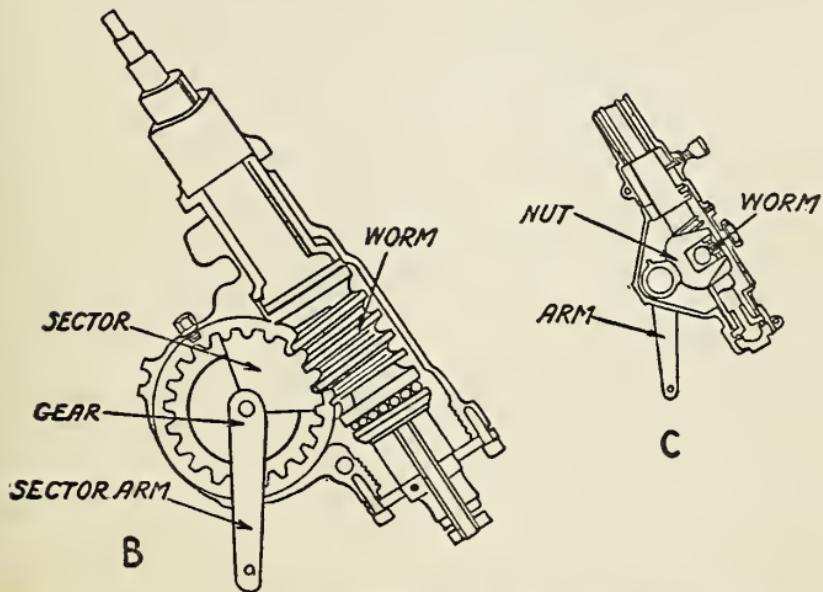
B. Worm gear exposed, showing bearings and thrust.
